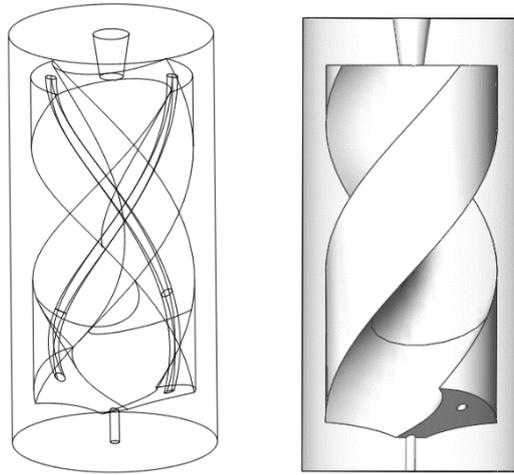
3D printed mold with inner channels on the left, filled mold on the right.
